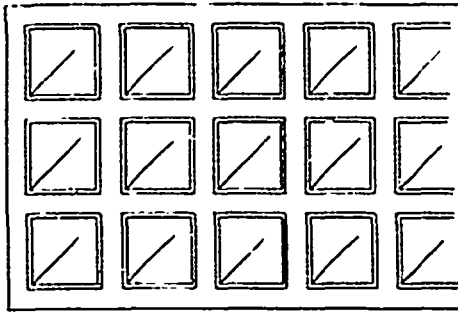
SECTION OF RACK FOR MOLDINGS—END VIEW.
